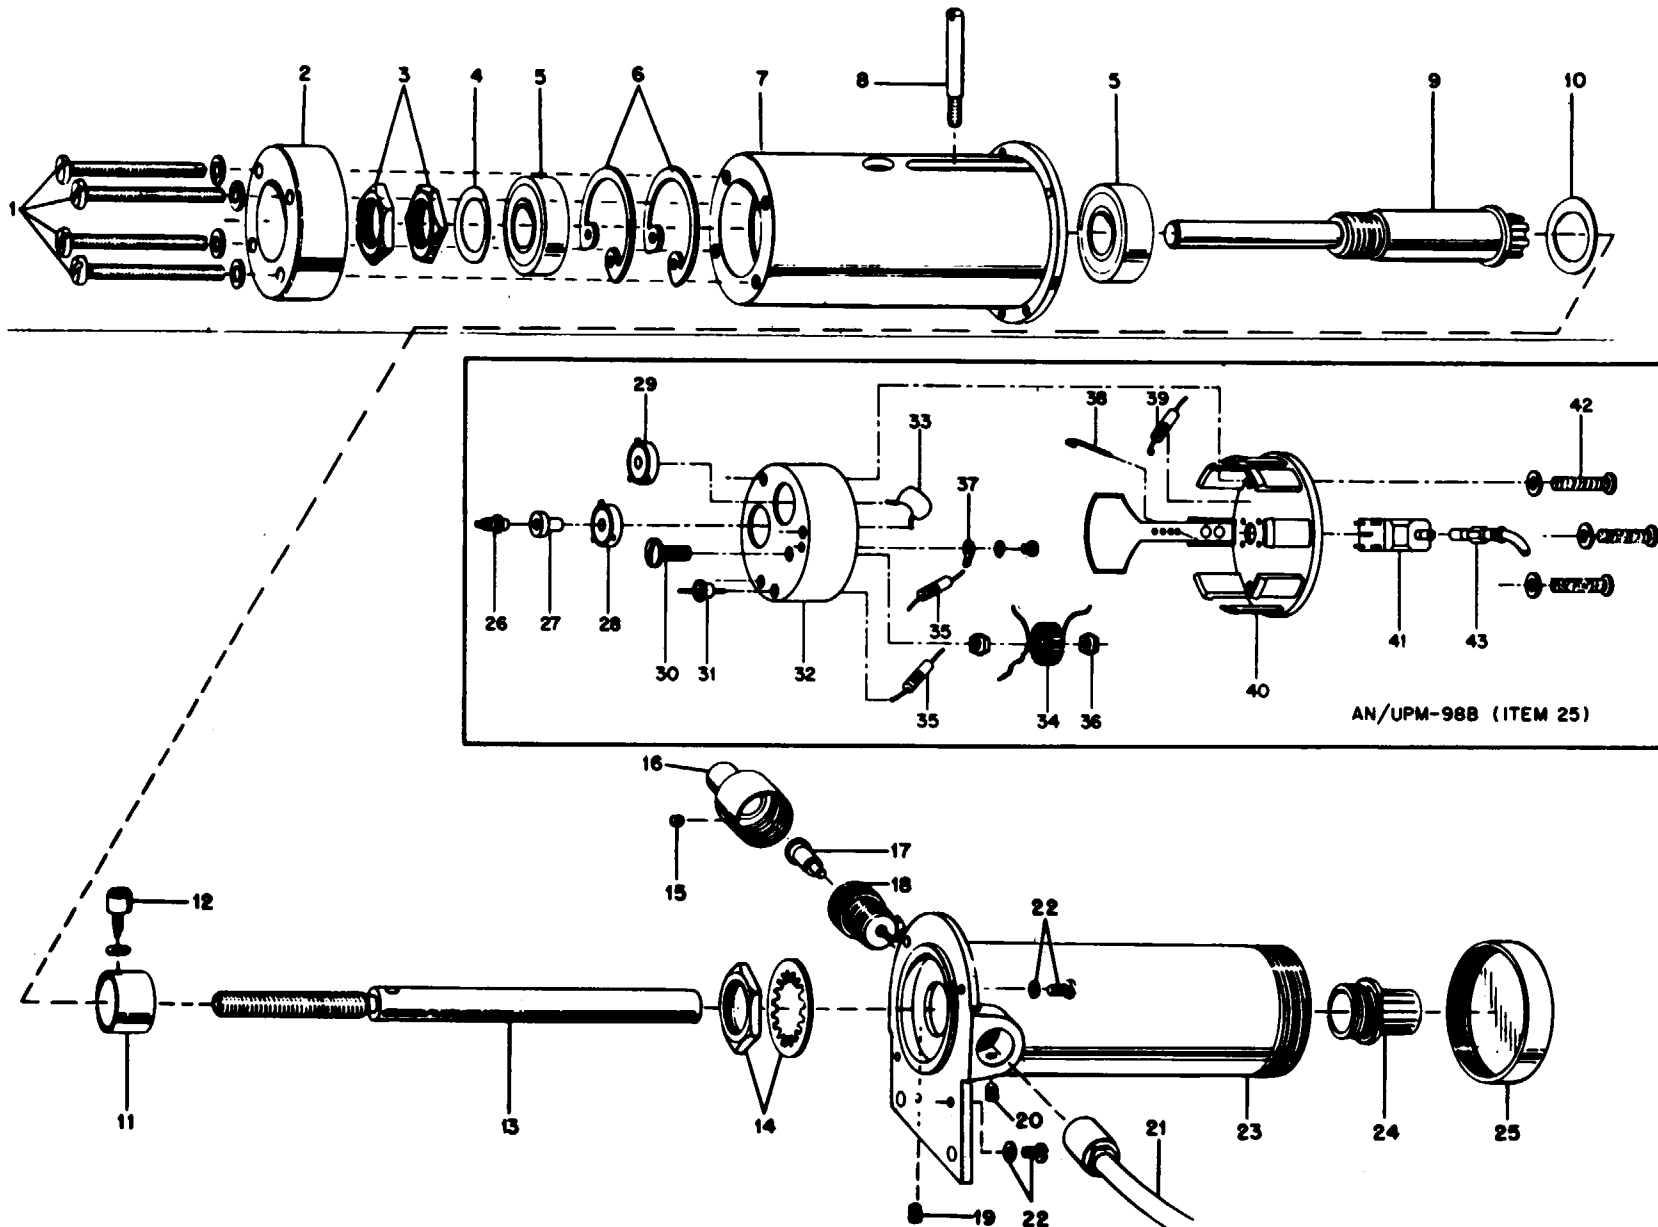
Wavemeter Assembly 8A3, Exploded View
